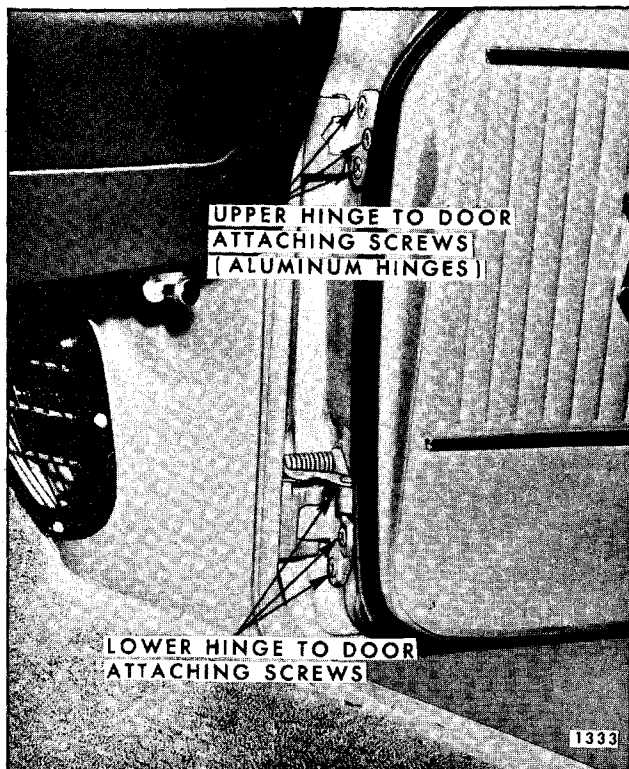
Front Door Hinge Attachment - "A" Styles
